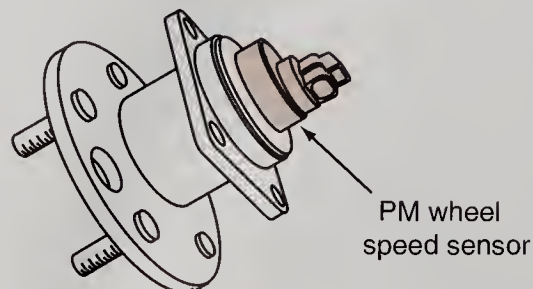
Shown is a GM hub-and-bearing assembly with an integrated PM wheel speed sensor.
